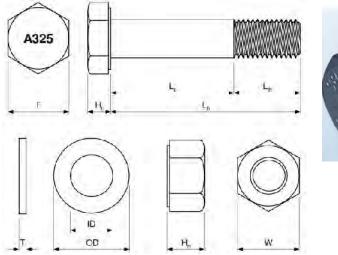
Nomenclature for Heavy Hex Bolt Dimensions
